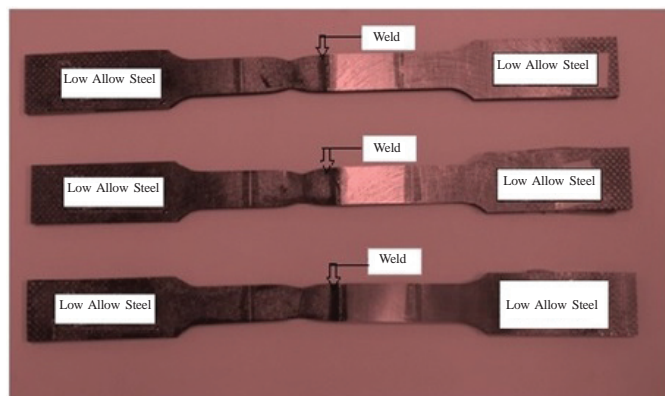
Photograph of welded transverse tensile specimen.
